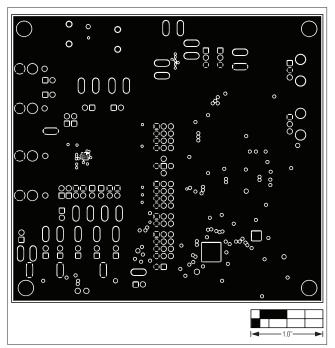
MAX9880A EV Kit PCB Layout—Layer 2
